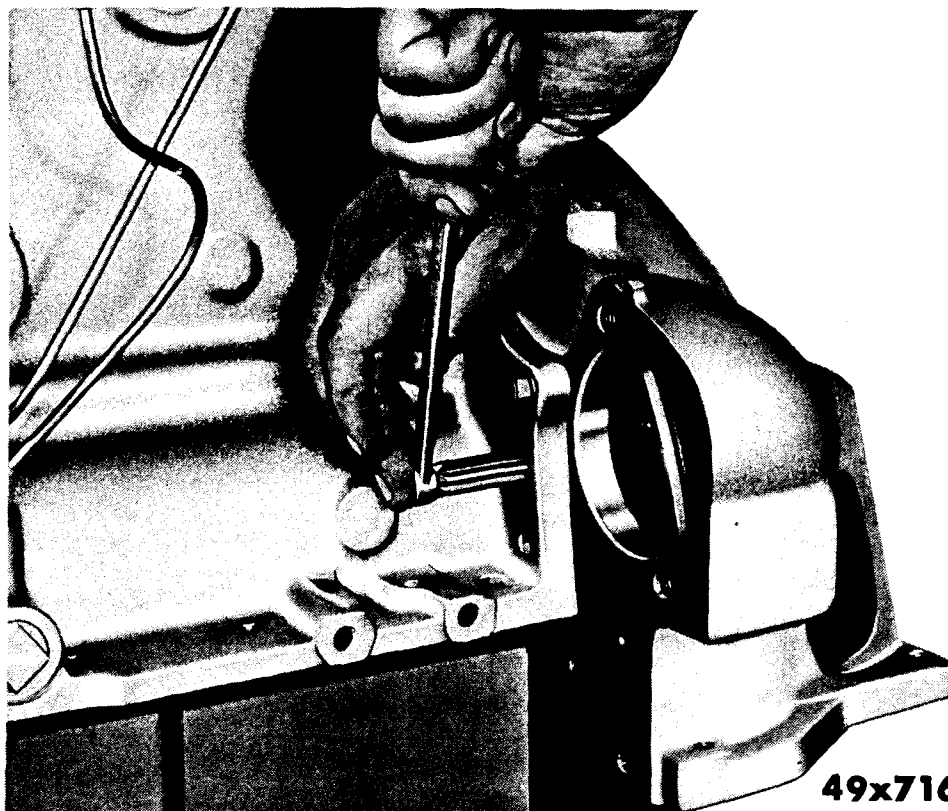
Checking Clutch Housing Using Tool C-435 (Typical)
